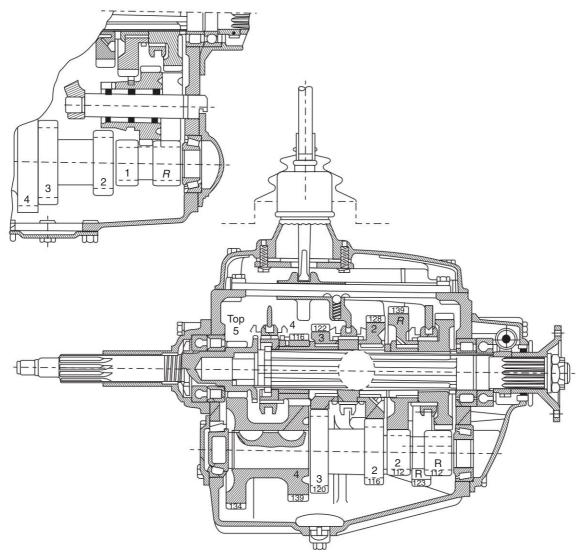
Section View of GBC 30 Gear Box Assembly (Courtesy: Telco)
